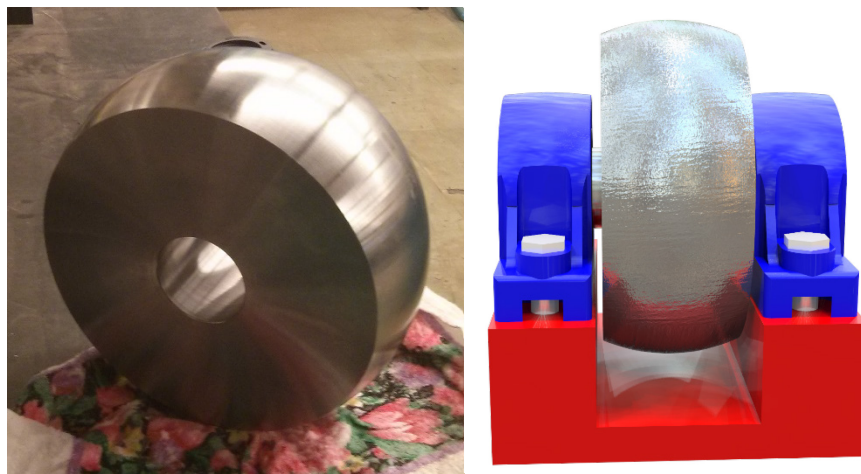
Rigid indenter (left) mounted on pillow-block bearings (blue) (right).
